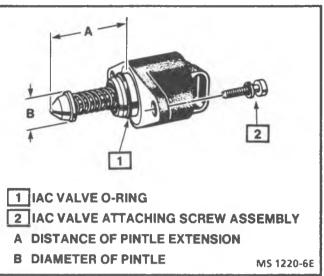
Flange-Mount IAC Valve - TBI 700
